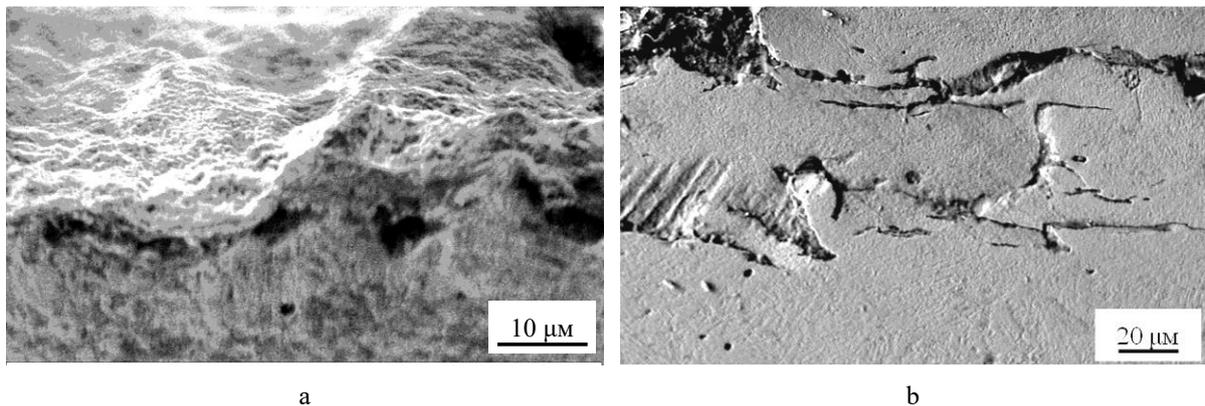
Banded arrangement of corrosion pits of corrosive pits initiated by non-metallic inclusions on the surface of the rivet hole (in the lower part of the image), in the vicinity of its transition to the operational fracture surface (a), as well as typical contact fatigue cracks found on the diametrical polished section of the rotor disc crest under the surface of the rivet hole (b)
